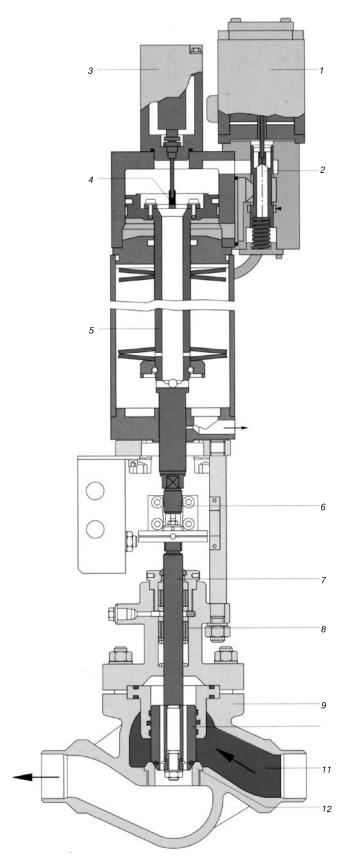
Section through an electrohydraulic actuator. Main components: 1, DC control magnet with integrated control electronics; 2, control piston; 3, position sensor; 4, clamp magnet; 5, drive piston; 6, piston rod; 7, stem; 8, stuffing box packing; 9, body; 10, trim; 11, fuel inlet; 12, seat. (Source: J.M. Voith GmbH.)
